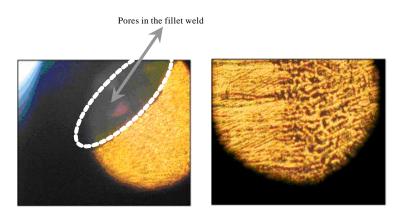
Metallographic inspection of fillet weld and heat affected zone. Magnification 100x
